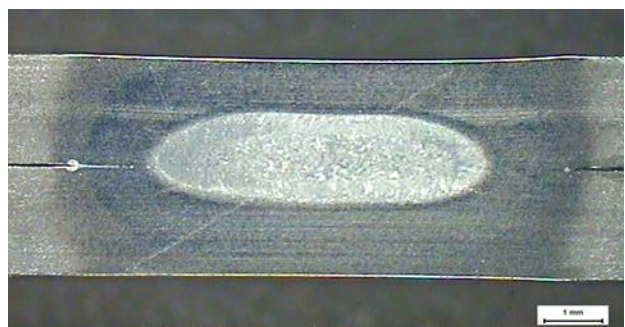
The nugget of spot welded joint (sample No.3)
